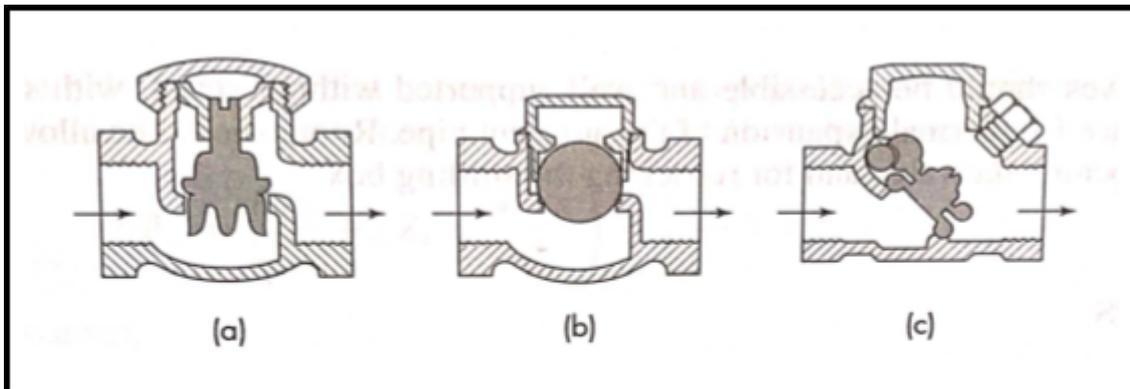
Check valve (a) lift check (b) ball check (c) swing check.
